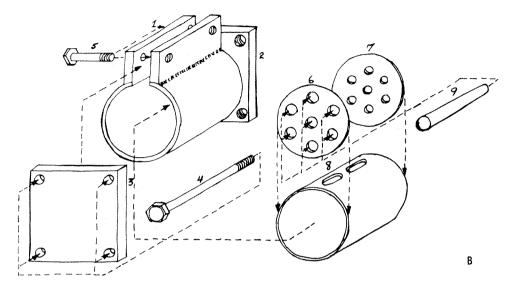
(B) Mold assembly for honeycomb collimator: 1. mold tube and port; 2. endplate; 3. endplate; 4. endplate bolts (4 needed); 5. mold port bolts (2 needed); 6. large focusing plate; 7. small focusing plate; 8. collimator shell; 9. taper pins (7 needed). Material: brass; pins and bolts: steel.
